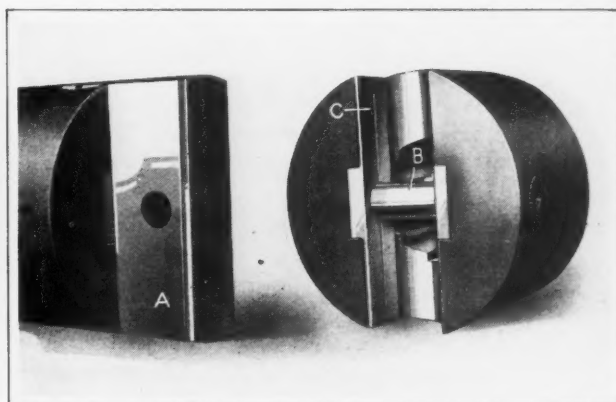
Coupling shown in Fig. 21 with Parts separated
